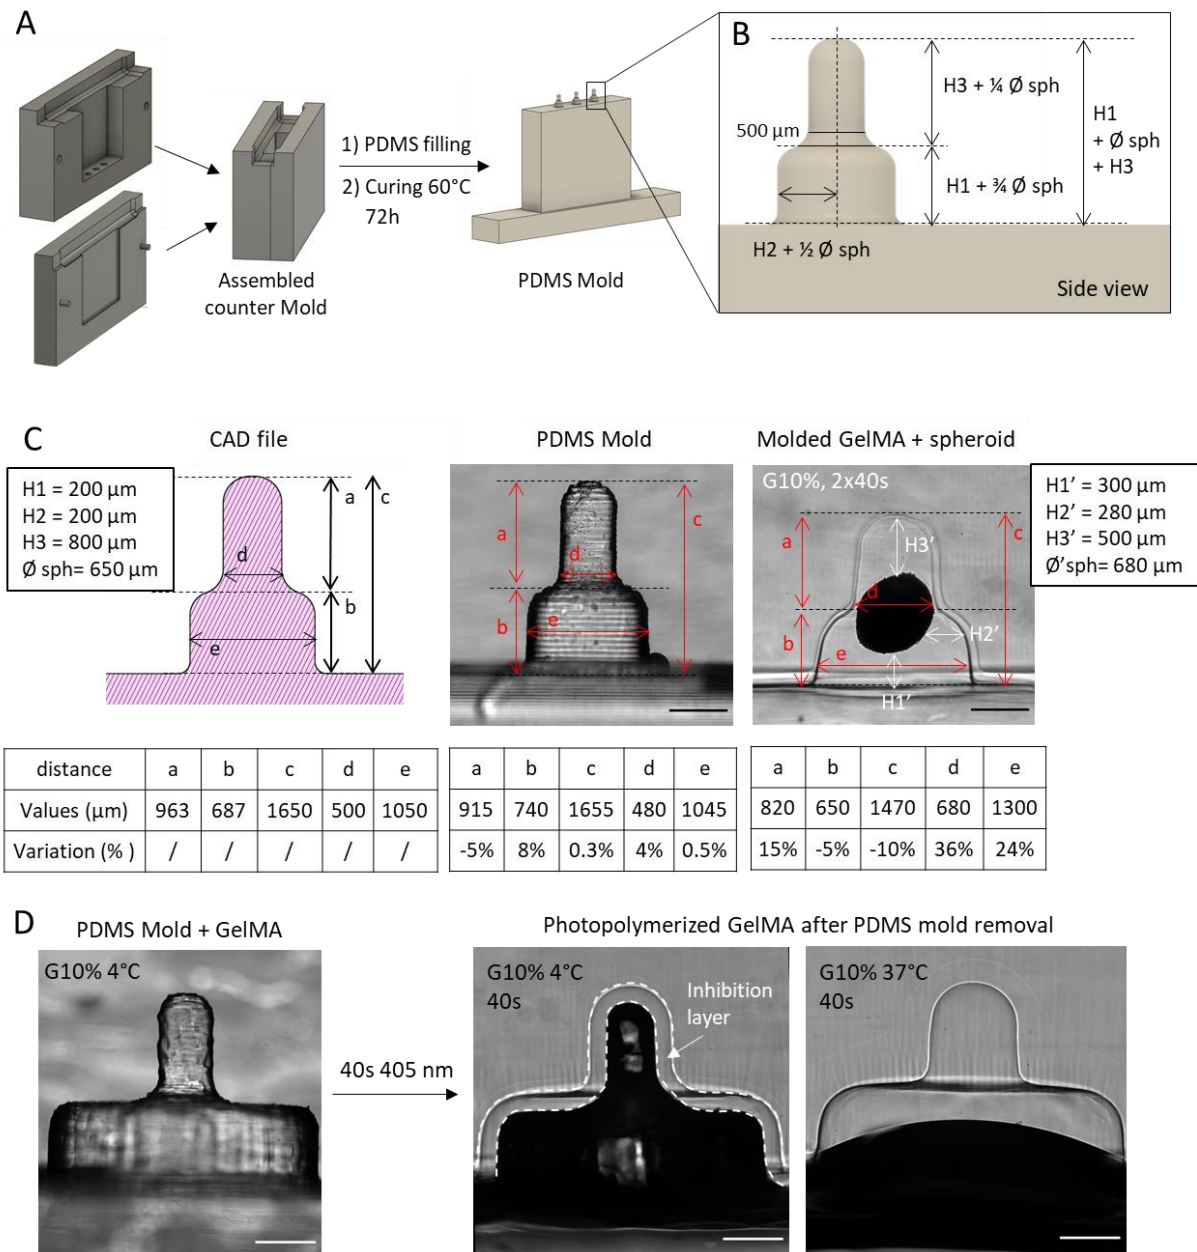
Mold generation and preliminary molding assays. A) Principle of PDMS mold generation. To facilitate PDMS mold removal, counter molds are 3D printed as two parts and assembled together before PDMS pouring. After curing, counter-mold is disassembled to obtain PDMS mold with intended design (CAD file). B) Side view of CAD file of mold for the generation of double interconnected cavities (Design 2). File is zoomed at the level of one pillar and shows how pillar dimensions are linked to intended spheroid distances to interfaces (H1, H2, H3) and average diameter ( $\text{Ø sph}$ ) of spheroid. C) Example of dimensions replication from CAD file (left image) to PDMS mold (middle image), to molded GelMA after GelMA filling and spheroid deposition (GelMA 10%, 2x40s of photopolymerization). Tables show expected and measured dimensions highlighted on images. D) Evidence of inhibition layer to photopolymerization in GelMA hydrogel. Scale bar: 500 µm.
